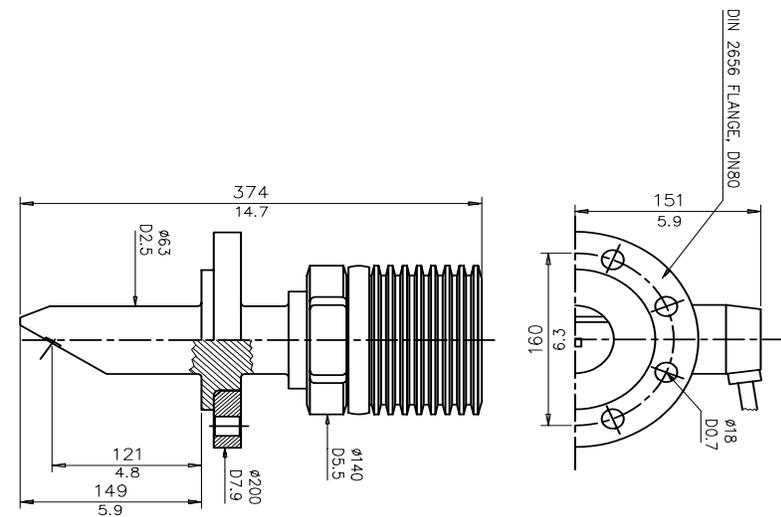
Dimensions: Sensor with flange. DIN 2656 DN 80 or ANSI B16.5 3" RF 150 PSI or JIS 10K 80A (mm/in).
